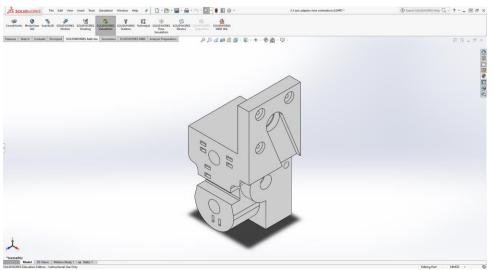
X-Y Axis Adapter with Stepper Motor Mount
